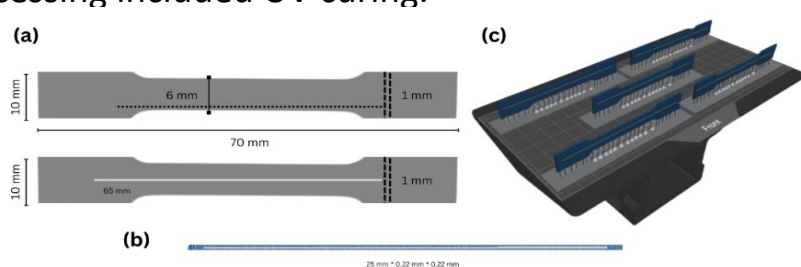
(a) Dumbbell Shape Specimen Dimensions. (b) Rectangular Cavity for Embedding Fiber. (c) 3D-Printing Layout in Chitubox_Basic, with Support
